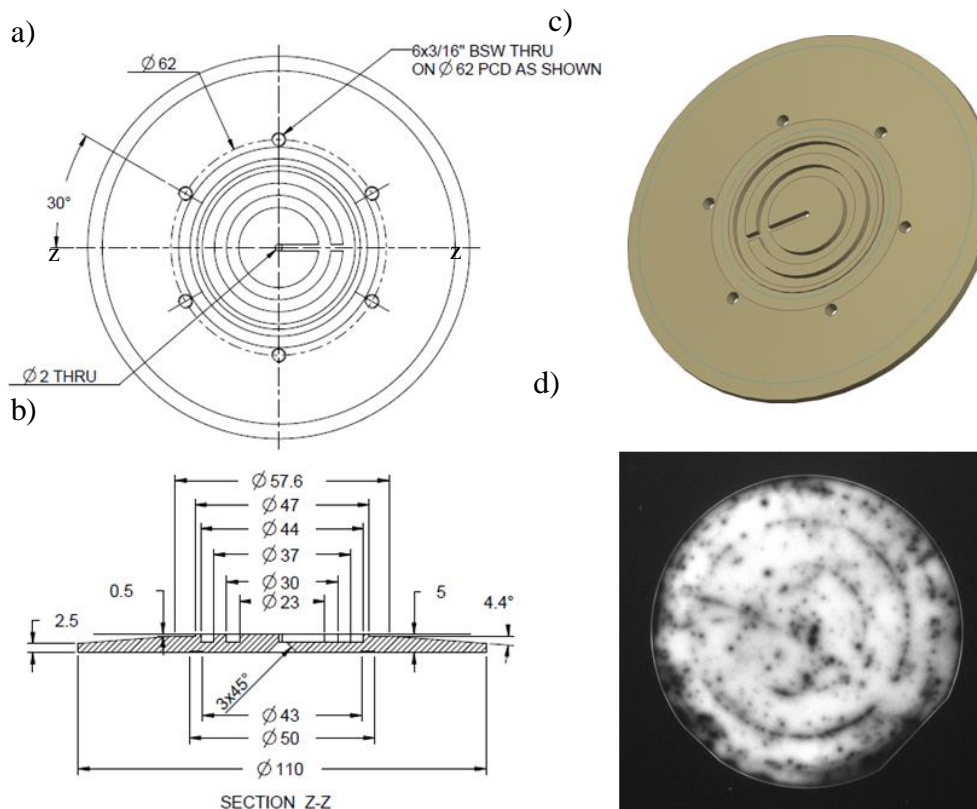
Schematic of the chuck-A with design details (all dimensions are in mm). (a) 2D top view (b) 2D section (Z-Z) view. The cutting line marked as Z-Z in Figure 5.3(a) shows where the part is cross-sectioned. (c) 3D view of chuck-A. (d) PL image of AlO_x film deposited using chuck-A.
